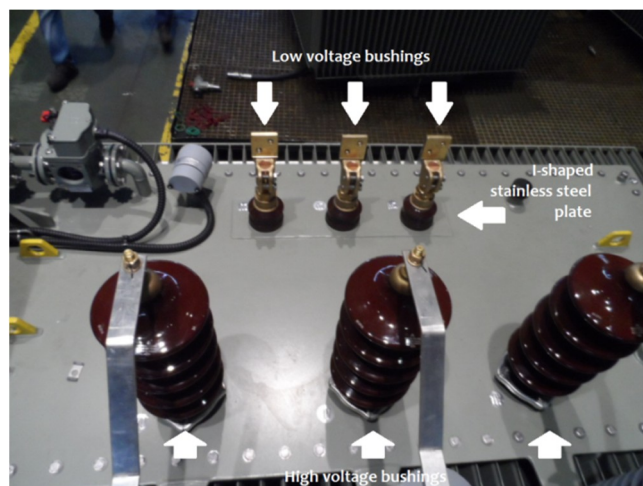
Top-plate of transformer tank with I-shaped stainless steel plate
